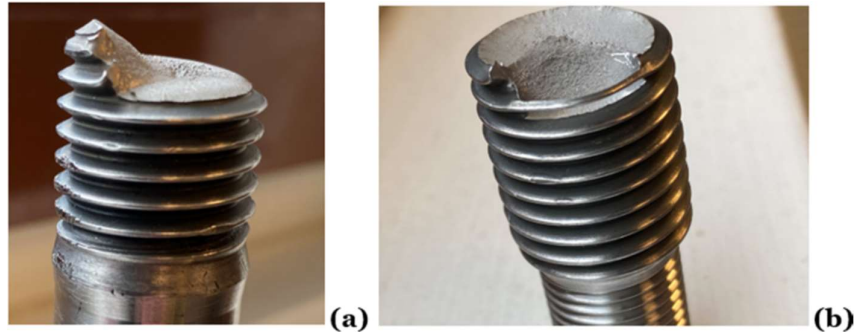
Breakage of bolt B, (a) threads not engaged with main nut, and (b) threads engaged
